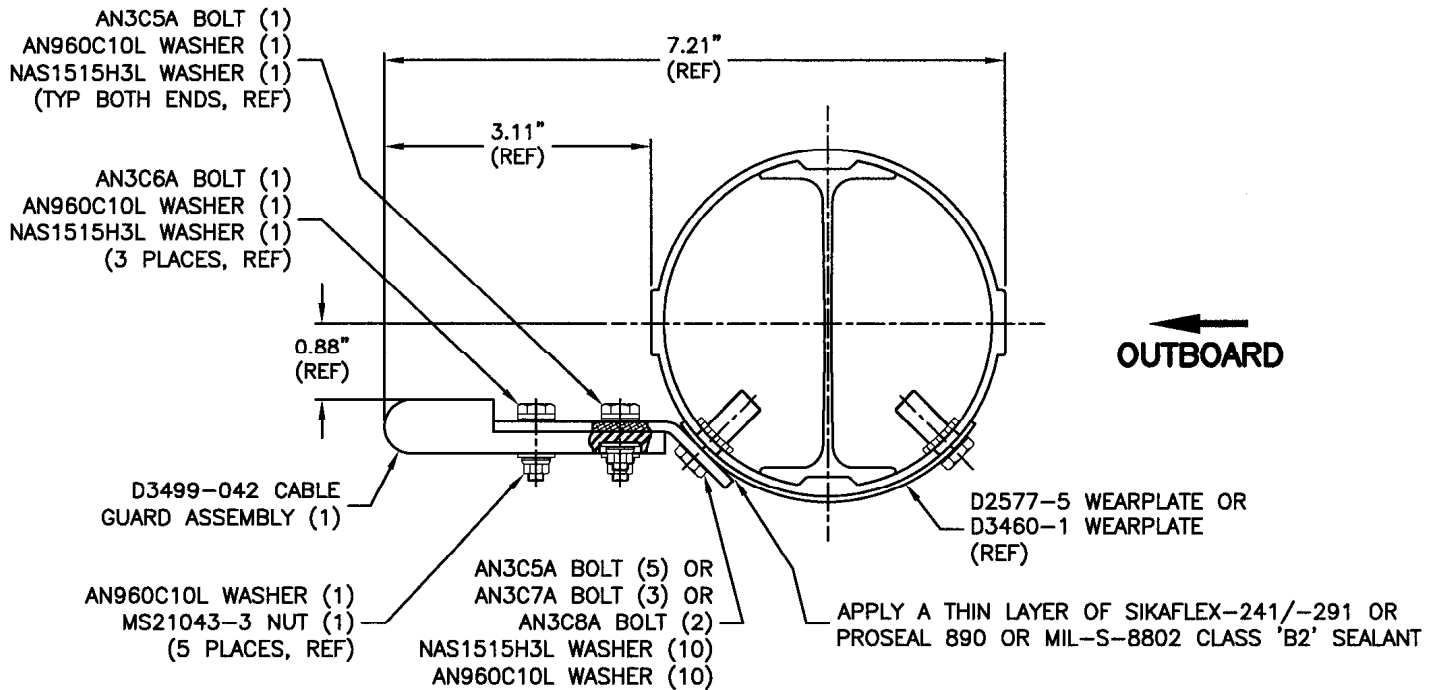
DETAIL A: CABLE GUARD INSTALLATION (VIEWED FROM R/H SIDE OF A/C)
